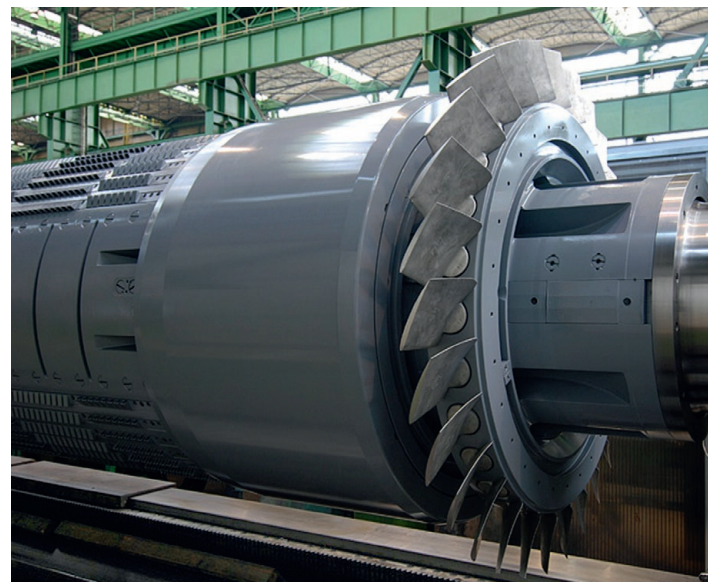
Turbogenerator rotor with slot wedges and a new fan mounted on the shaft
